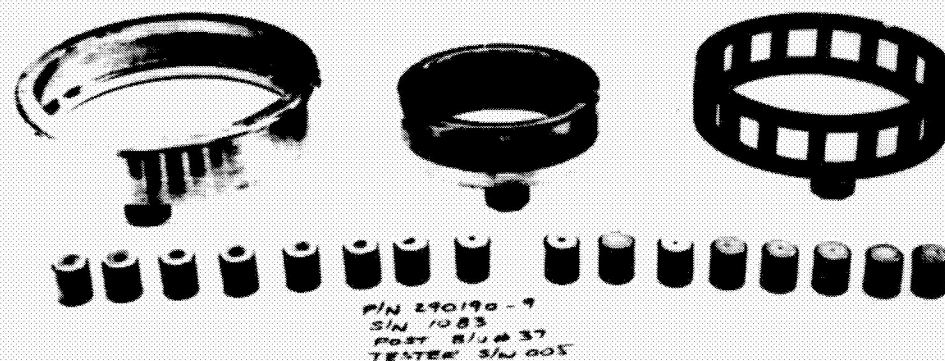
Posttest (Third Segment) Appearance of Motor Roller-Bearing Components with No Evidence of End-Wear or Other Damage
